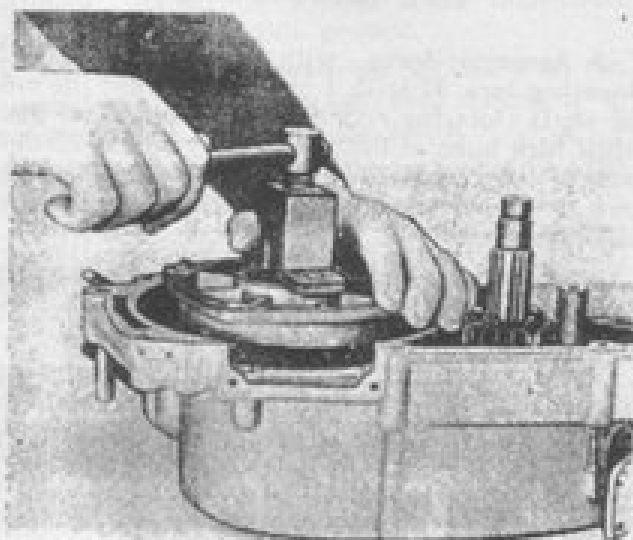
Pressing-off the HJK-10-3 motorcycle crank chamber cover (1-st method).
